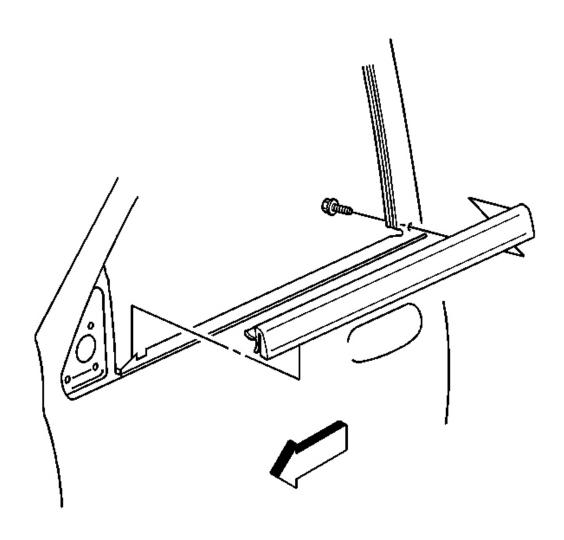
Identifying Sealing Strip (Front Door Window Belt Outer) Courtesy of GENERAL MOTORS CORP.
